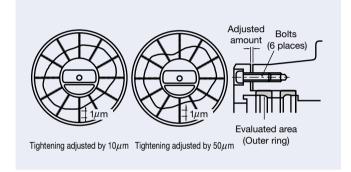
Deformation of the Outer Ring of a Double Row Cylindrical Roller Bearing Caused Excessive Tightening
